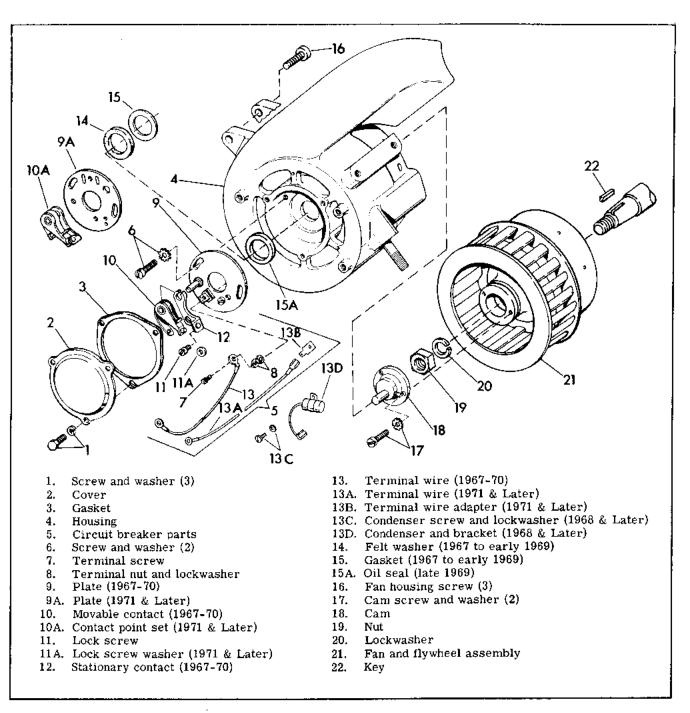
F-12A. Circuit Breaker and Fan (1967 & Later D, 1969-1972 DC Model) - Exploded View
